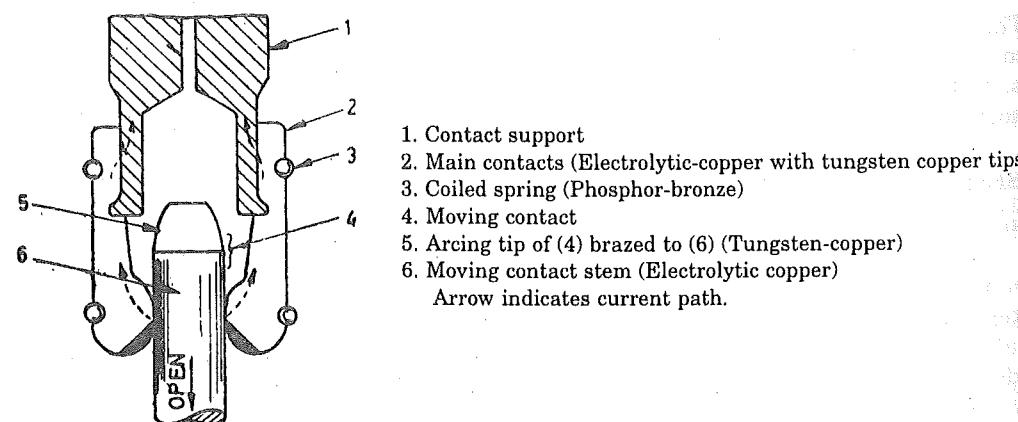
Typical finger contact assembly in oil circuit-breakers.
